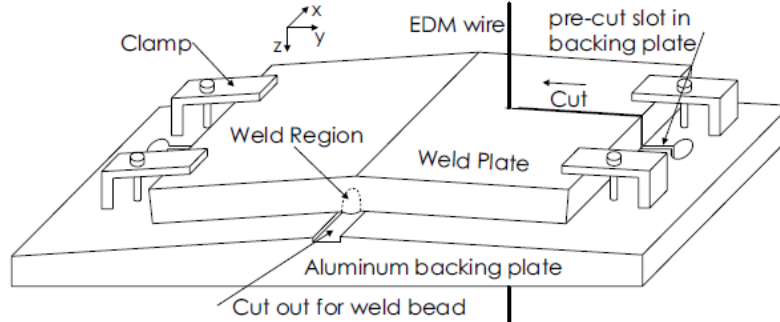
Fixture arrangement for the EDM cut of weld plate. Reprinted from [15]
